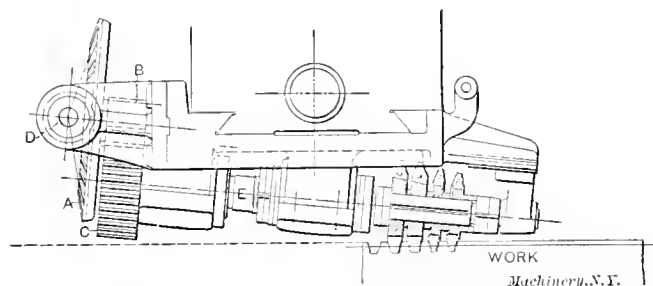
Diagram showing Angular Position given the Spindle of the Rehnecker Rack-cutter to obtain Large Driving Gear at C.
